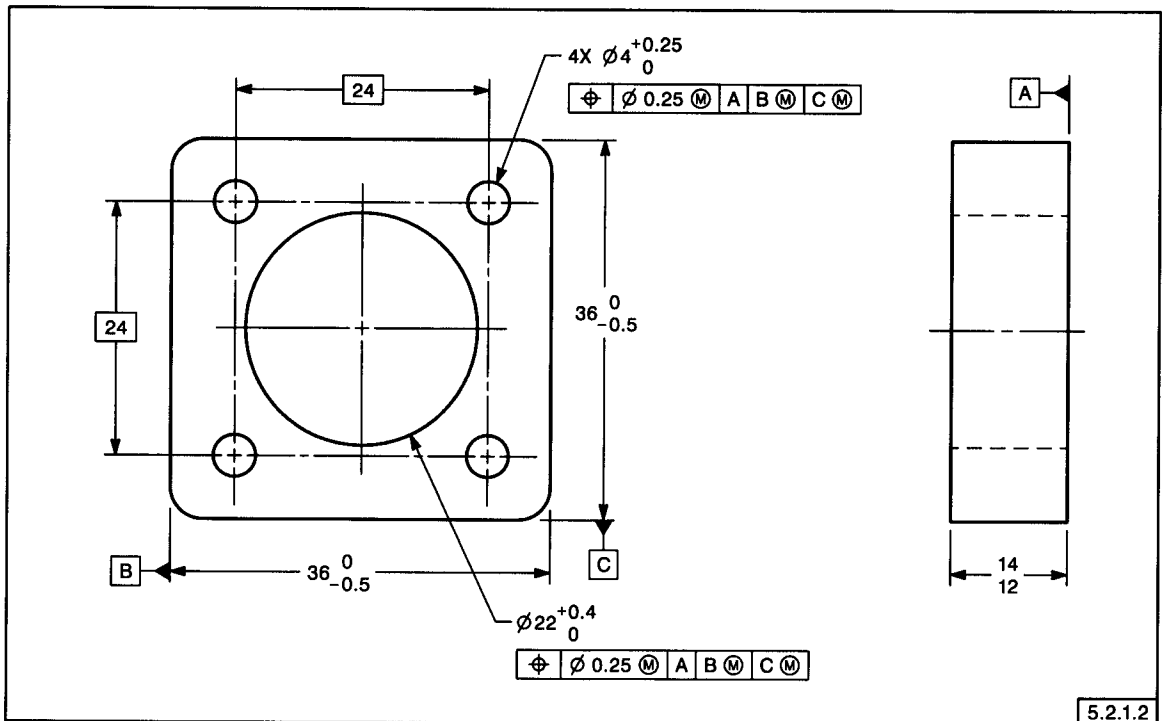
POSITIONAL TOLERANCING AT MMC RELATIVE TO DATUM FEATURE CENTER PLANES
